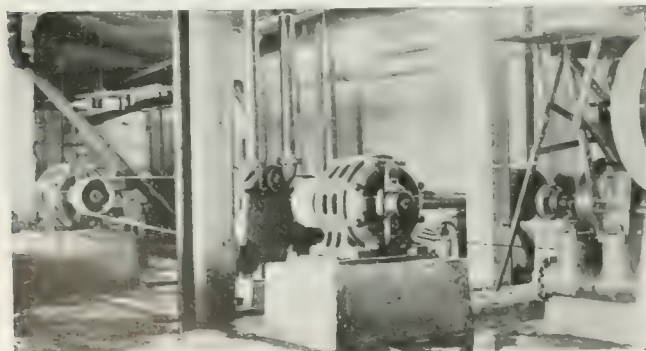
CONSTANT SPEED END OF PAPER MACHINE
